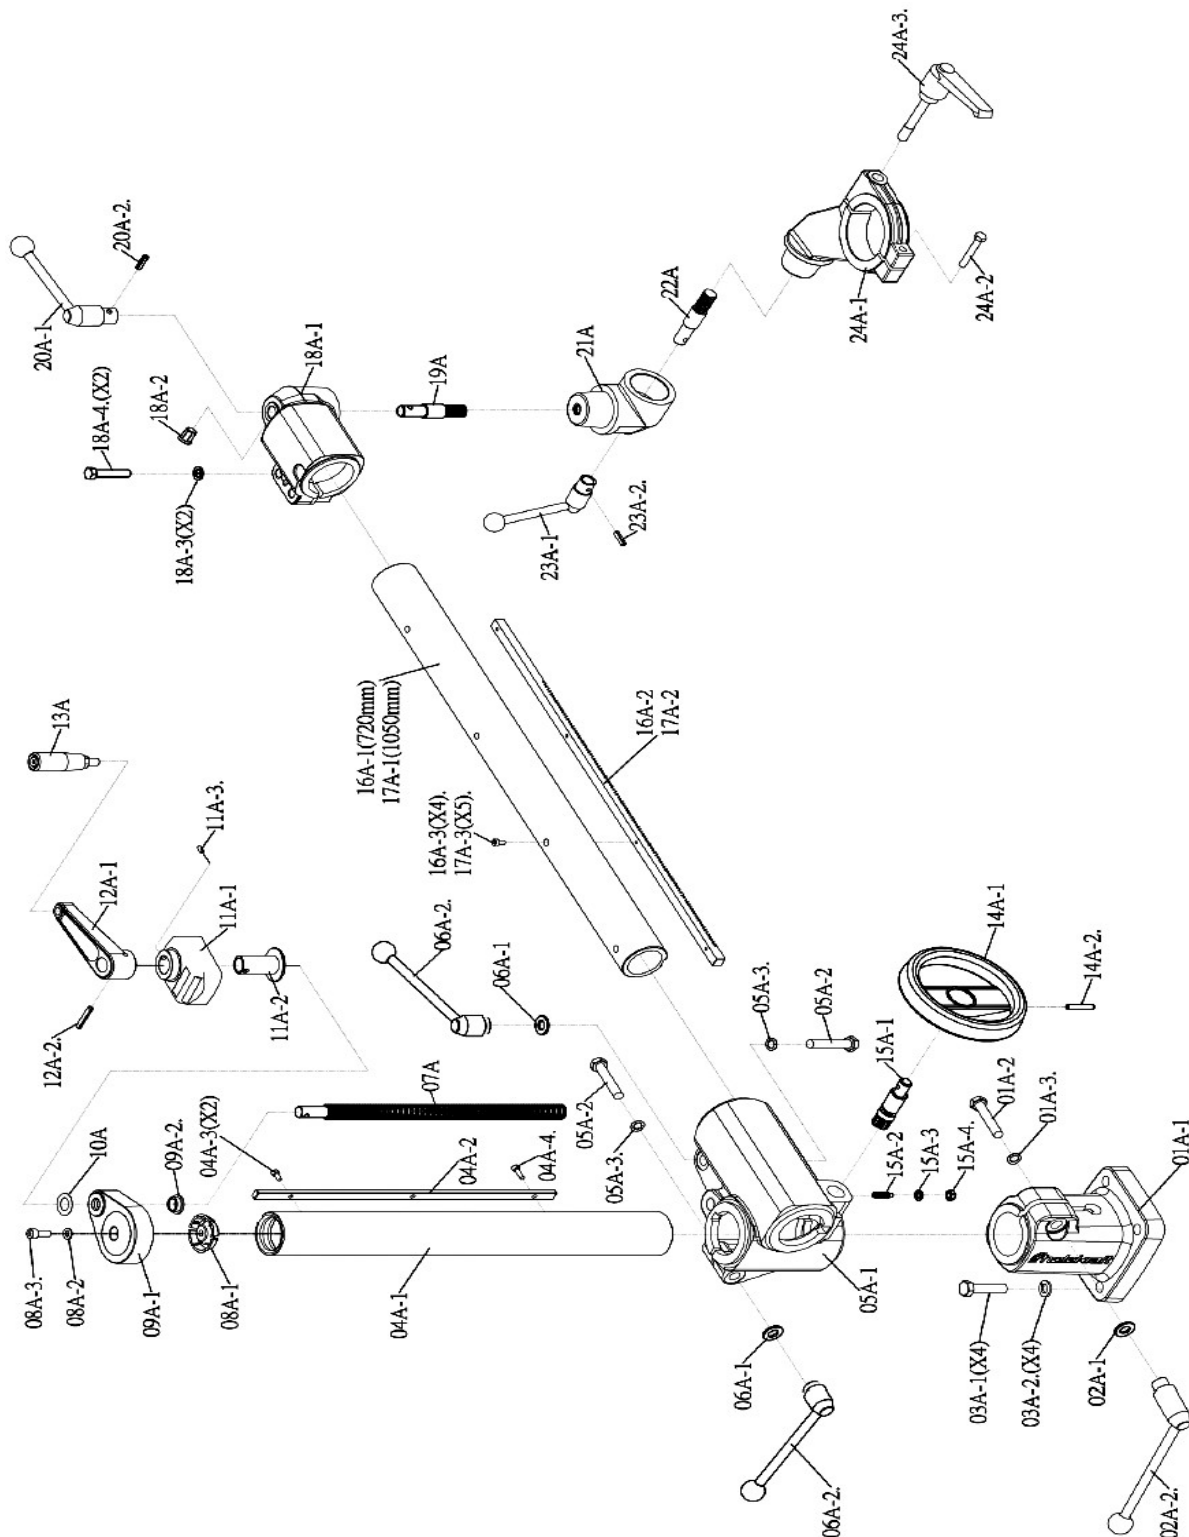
Spare parts drawing 2 - tripod of feed unit VSA 38L
